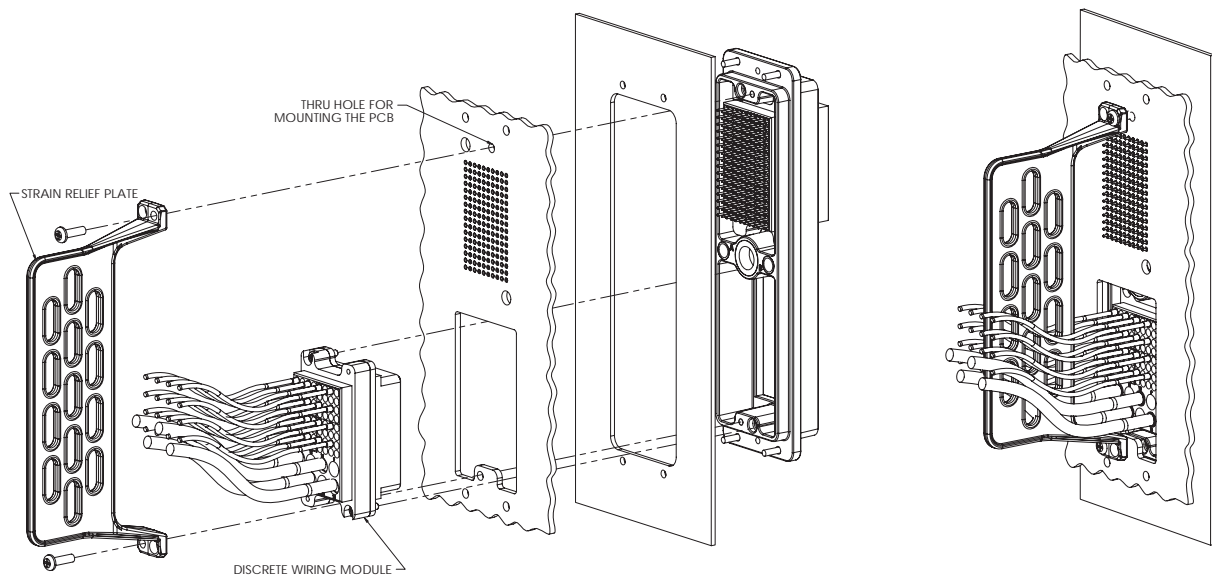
Figure E. A strain relief plate, Part # 310 113 456 can be used with a PCB as shown. To do this put thru holes on the PCB and use a 4-40 pan head screw.
